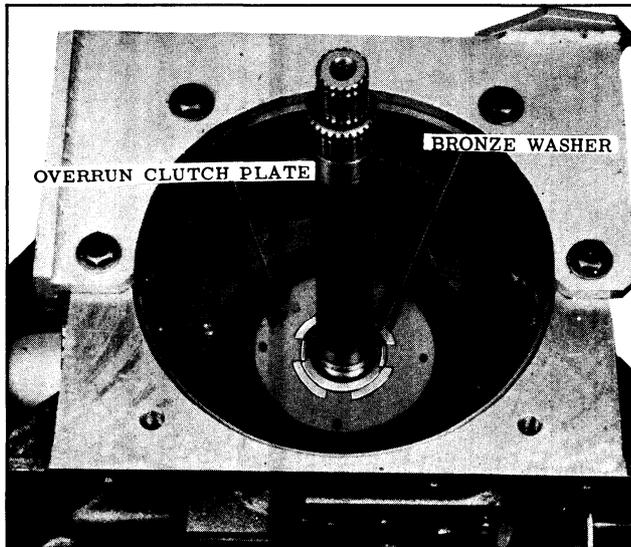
Clutch Plate & Bronze Washer Installation
